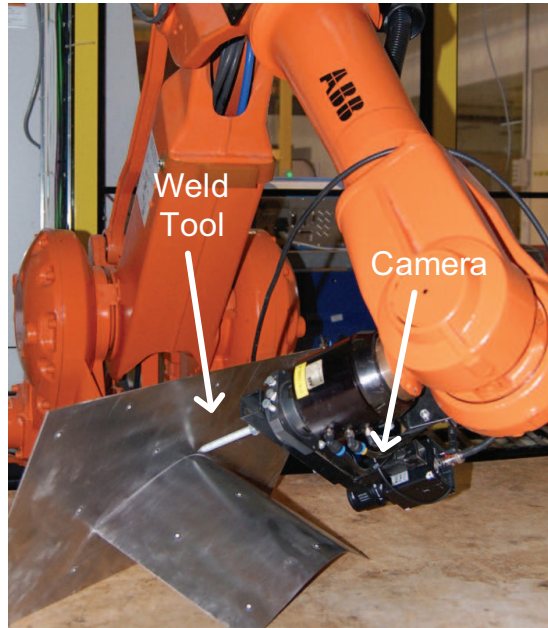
A robot following a 3D weld joint. The camera is mounted on the robot hand.
